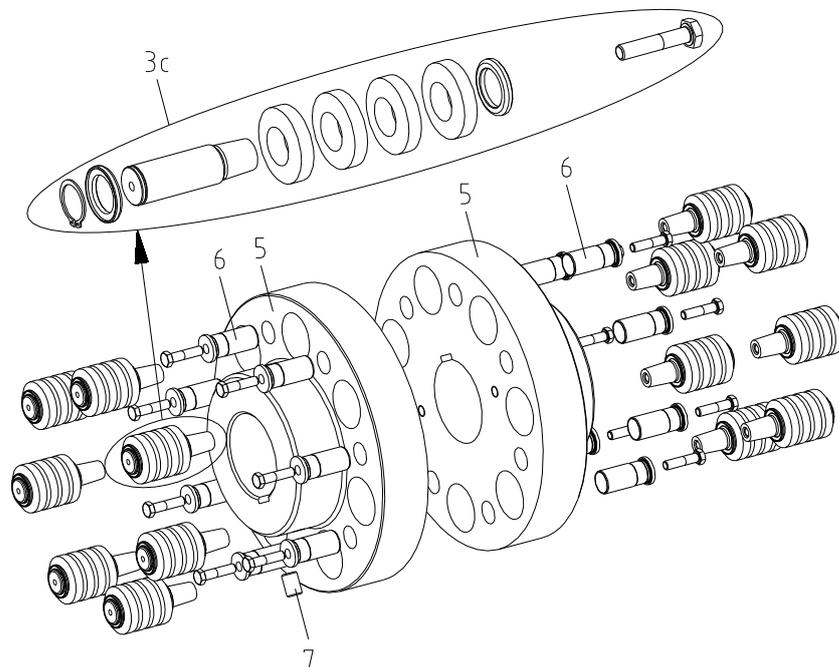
REVOLEX® type KX-D (taper pin design B)
